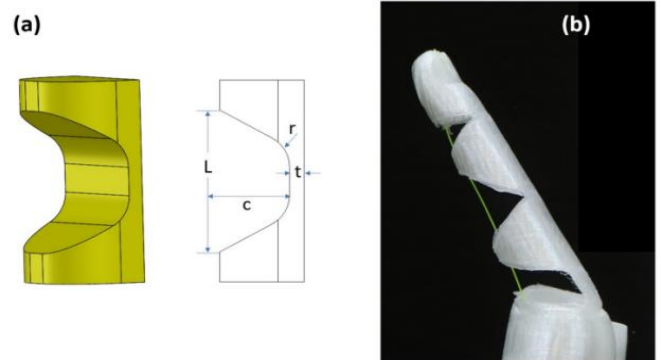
A soft monolithic finger with flexure joints: (a) Corner-filleted flexure joint and design parameter; (b)Finger with three corner-filleted flexure joints (one actuation cable is threaded through the 3 flexure joints).
